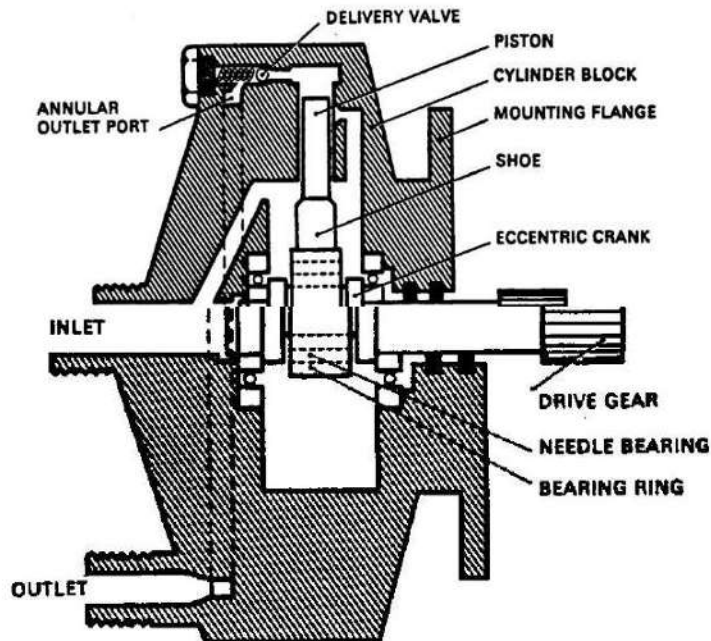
Typical Radial, Piston-type, Hydraulic Pump - Side View
